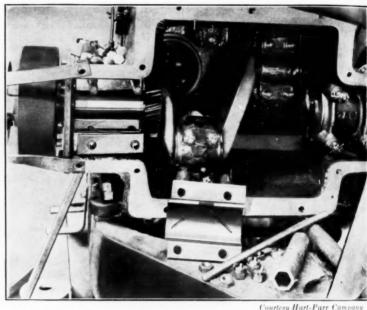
Illustration of main bearing details on a modern tractor, showing the necessary parts, etc.
